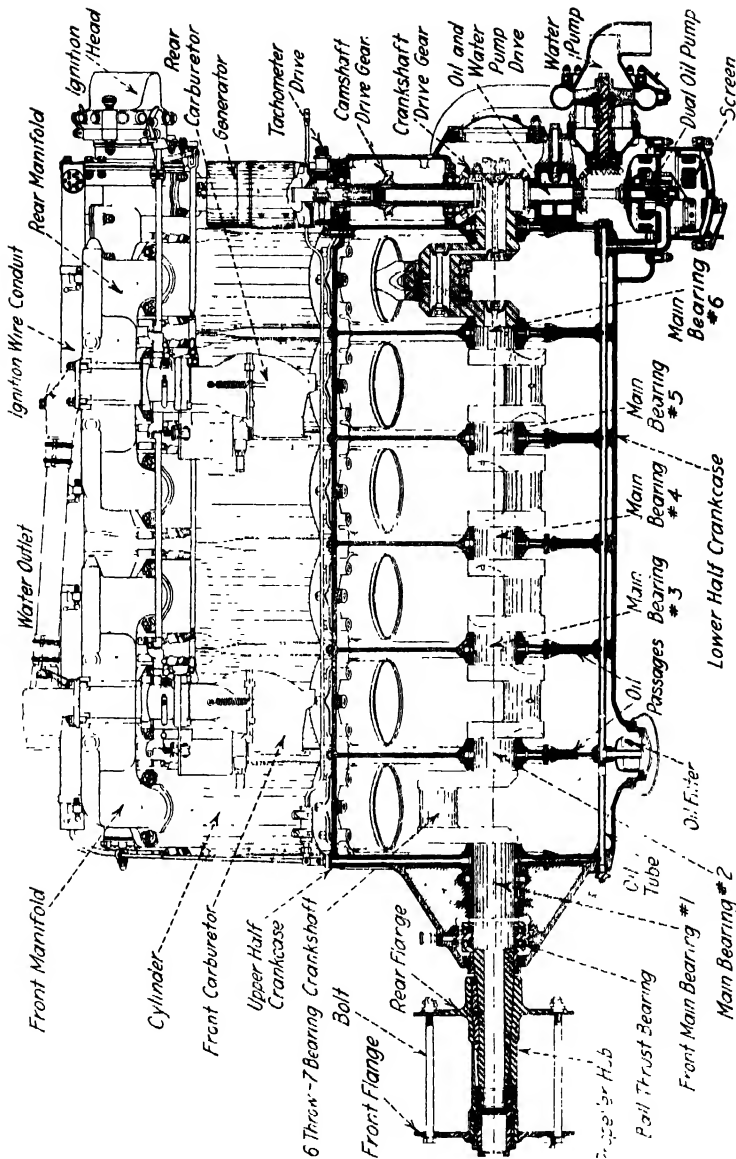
Longitudinal Section of Liberty Engine Crankcase Showing Simplicity and Strength of Parts.
